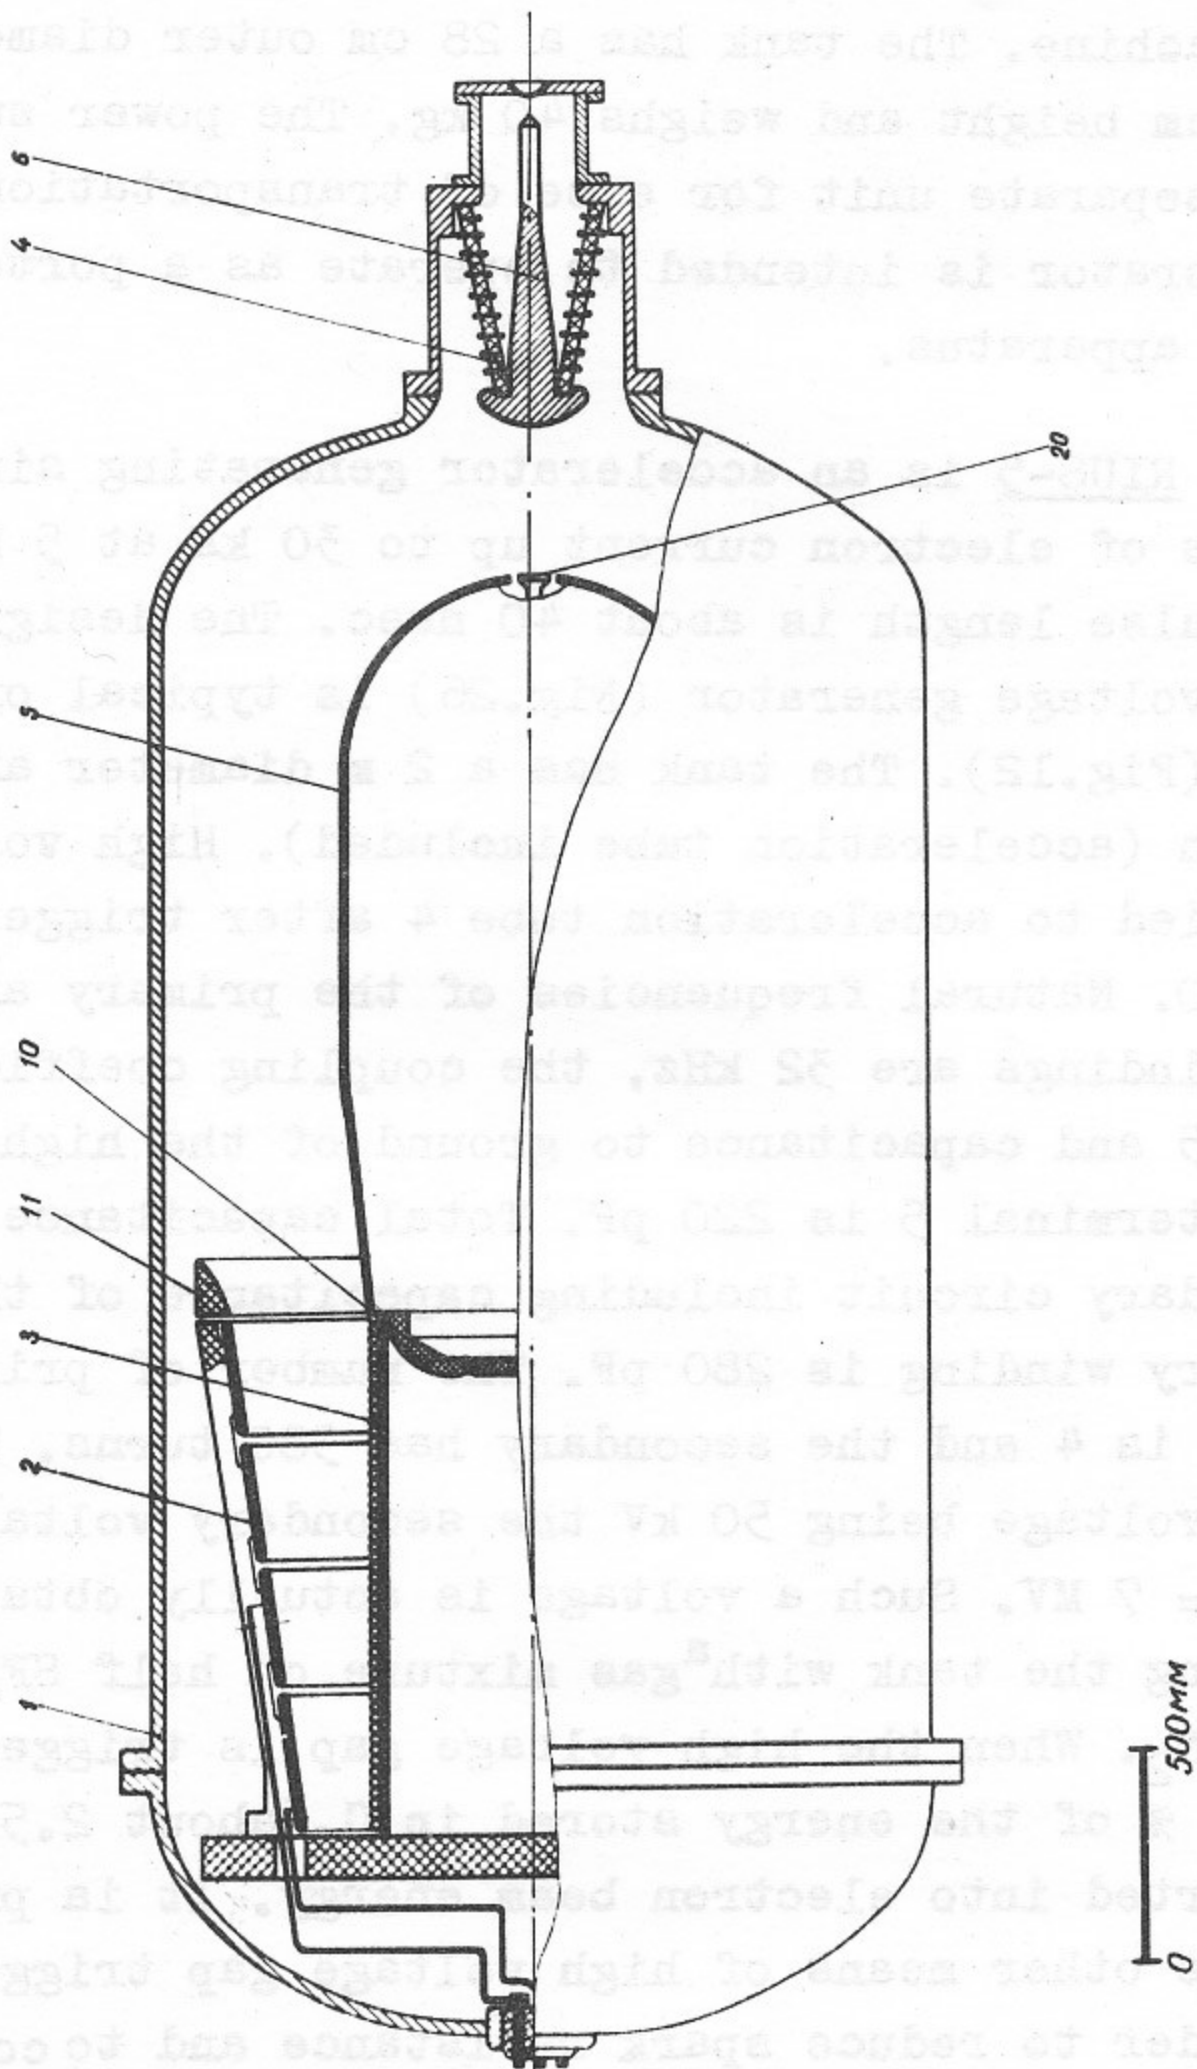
Design of RIUS-5. Legend for parts on p. 53.
